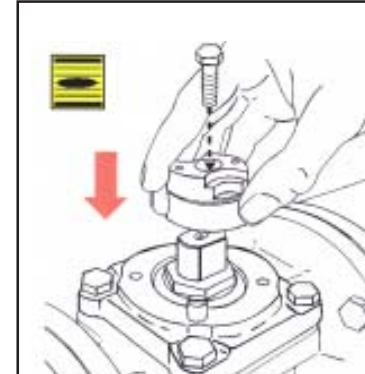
Secure adaptor to valve, apply thread lock to valve adaptor fixing bolt thread. (Loctite Grade 221 or equivalent).
